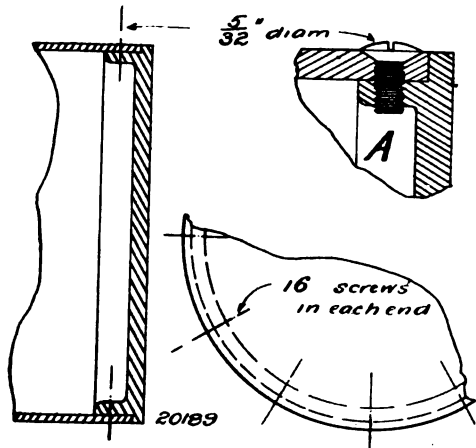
SECURING TURNED FLANGED CAST ENDS BY SCREWS.
